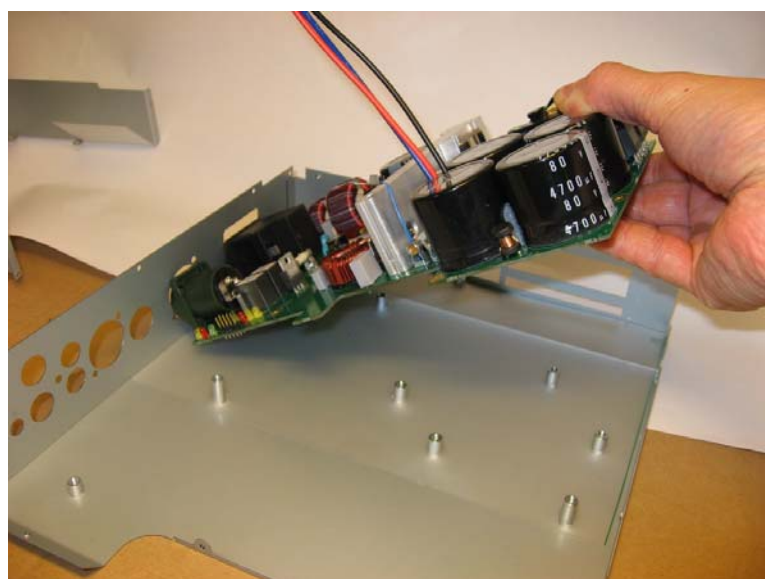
Mount the power board in the inner box. Be sure to put it in, in an angel so the surface mounted components on the backside of the PCB are not damaged.
